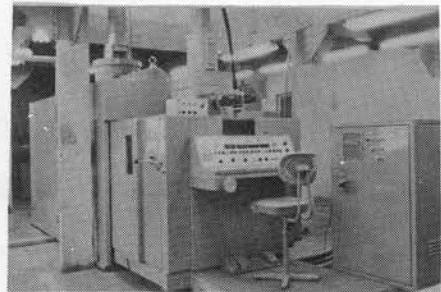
150kV-40mA, 6kW Electron Beam Welder
